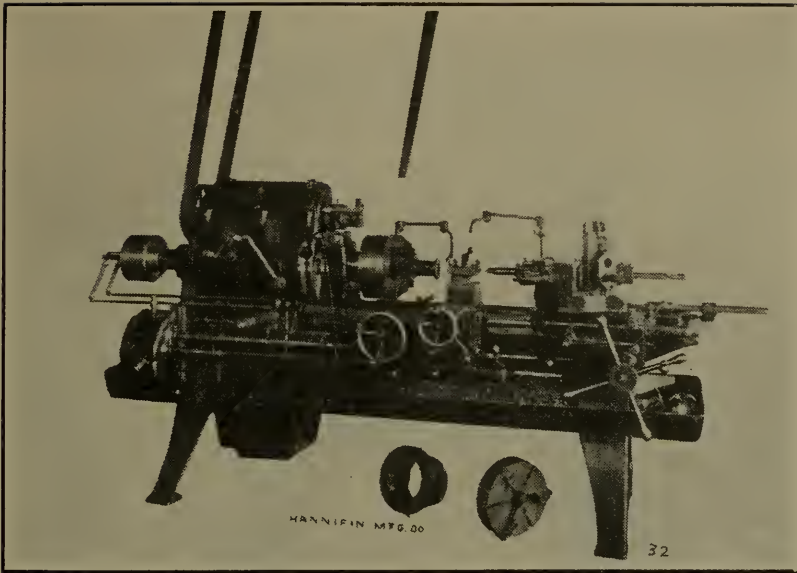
A large turret lathe equipped with an air operated universal chuck.
